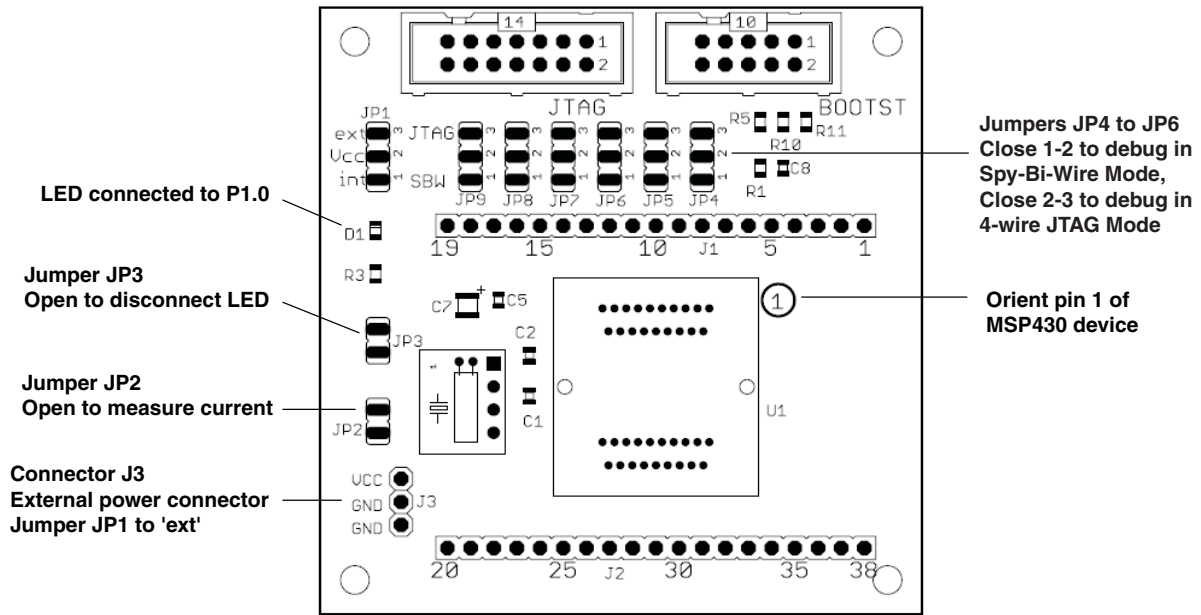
MSP-TS430DA38 Target Socket Module, PCB
